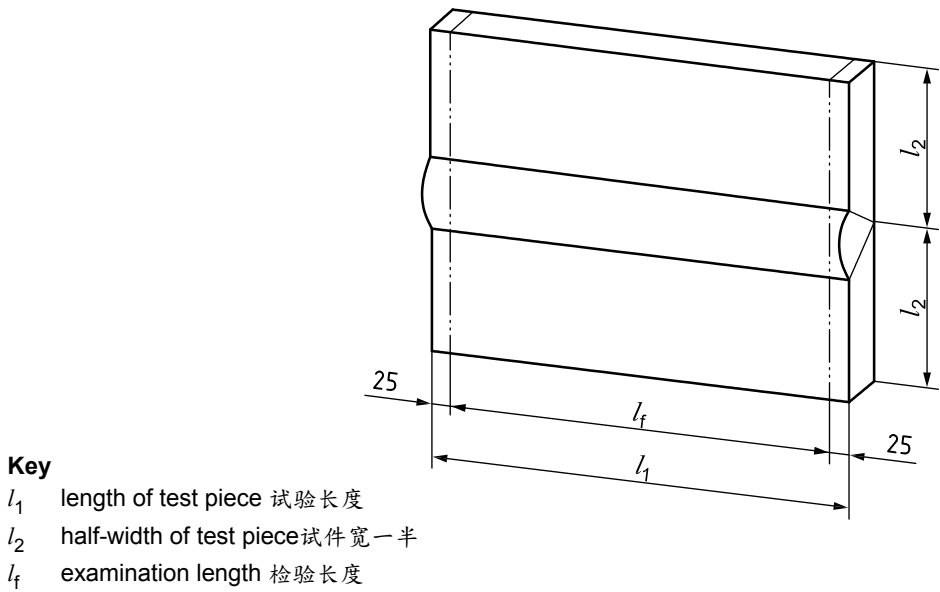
Examination length for fracture test specimens for a butt weld in plate
